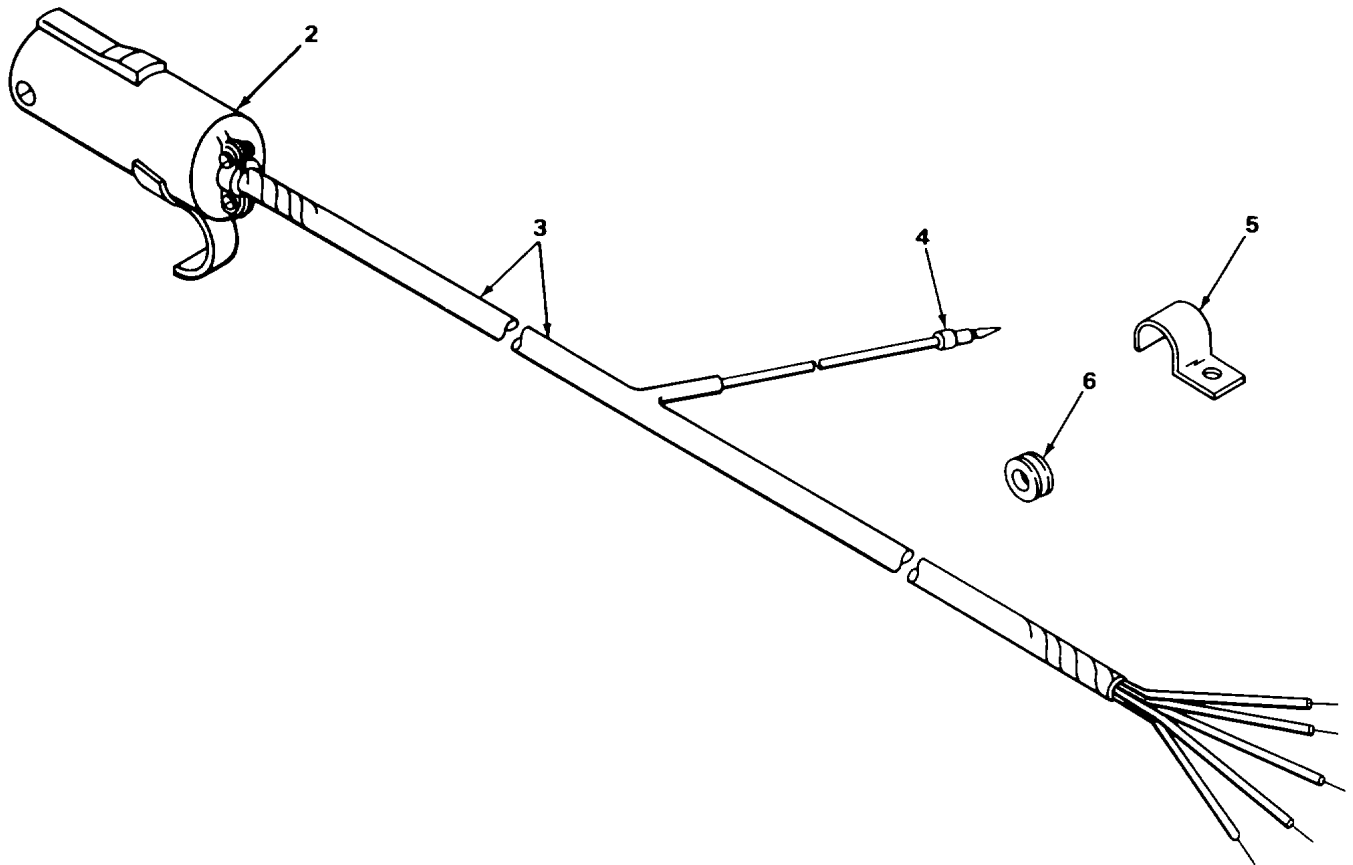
MAIN WIRING HARNESS ASSEMBLY
